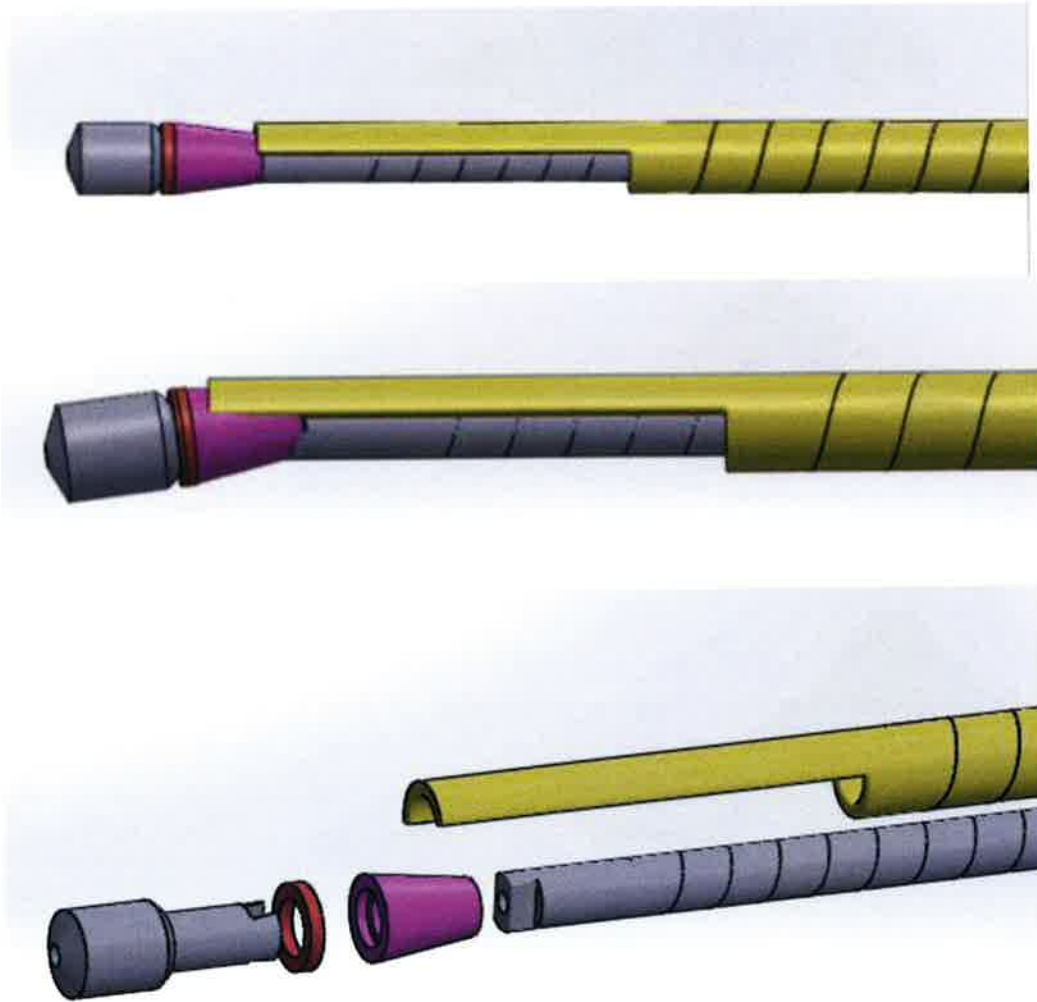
The 12mm conical bearing design is shown above. In this design, the follower sleeve (shown in yellow) is advanced over the conical bearing (purple) to force the flexible reamer shaft, illustrated as the gray spiral cylinder, to bend away from the follower sleeve's over hang thus deflecting the reamer head.
